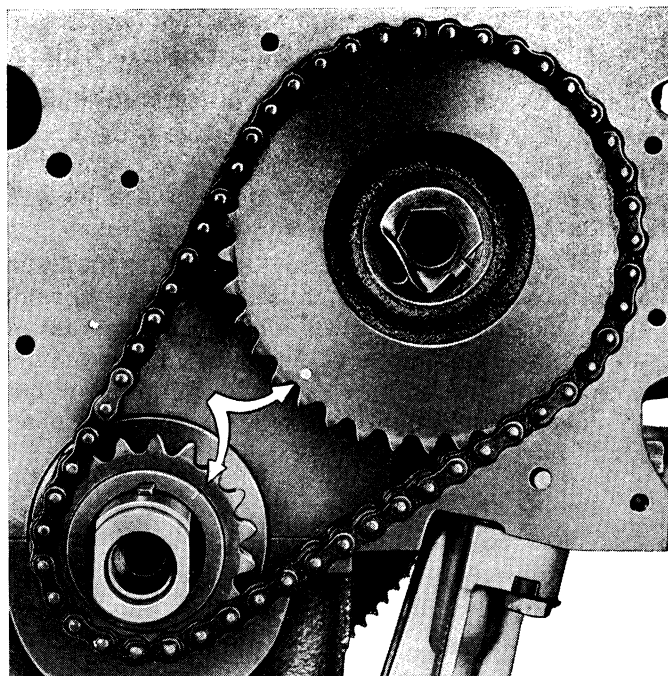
Valve timing marks on drive and driven sprocket (engine 115 C.005).
